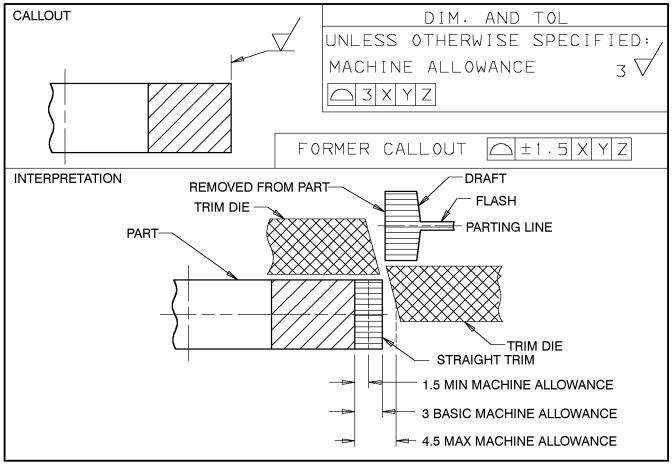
Machine Allowance - Forging Draft Removed - Parted Surface
